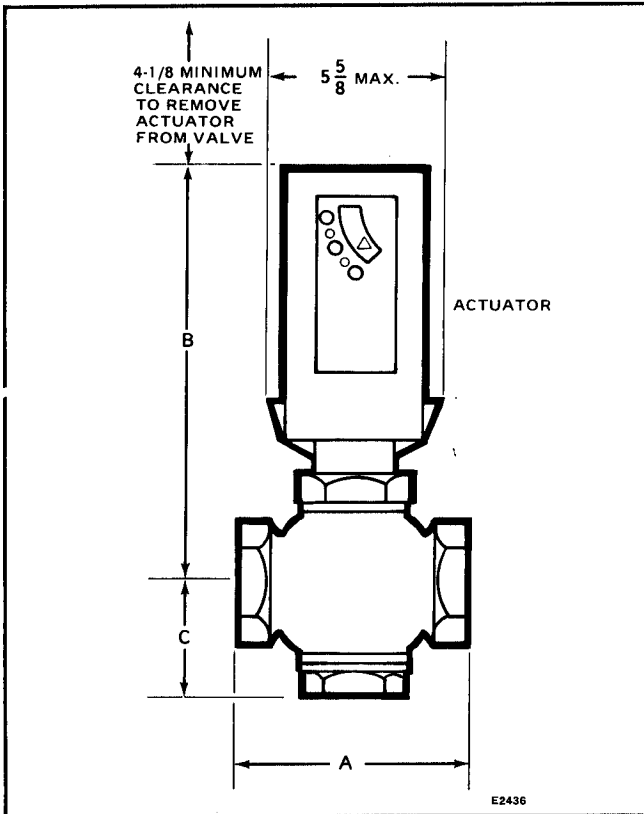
T4031D MOUNTING DIMENSIONS IN in. [mm IN BRACKETS].
